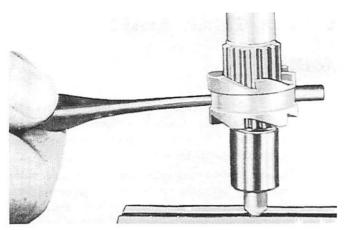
Removing Cross Pin from Sliding Clutch C. DISASSEMBLY OF PROPELLER SHAFT AND GEAR ASSEMBLY
